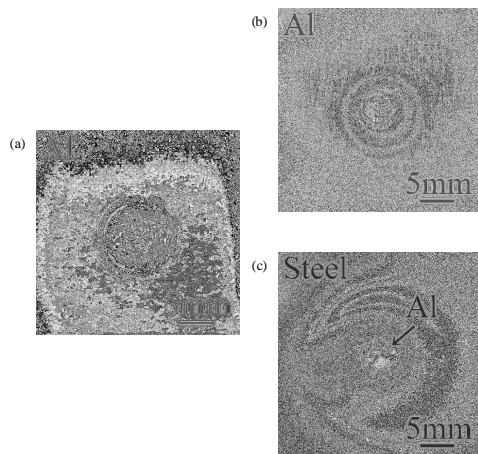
Macroscopic appearances. (a) Upper surface of the aluminum plate of the lap joint. (b) Fracture surface of the aluminum plate after the cross tension test. (c) Fracture surface of the steel plate after the cross tension test.
